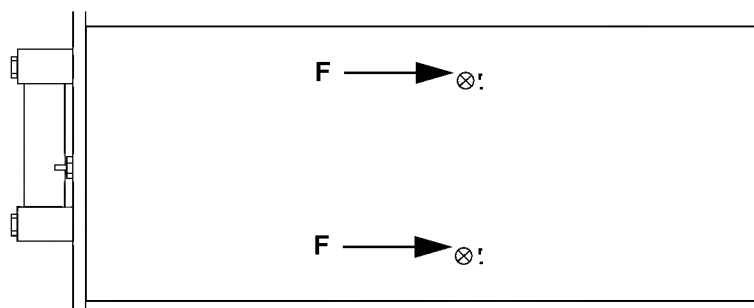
To remove the SLIO PCB detach the intermediate plate.
